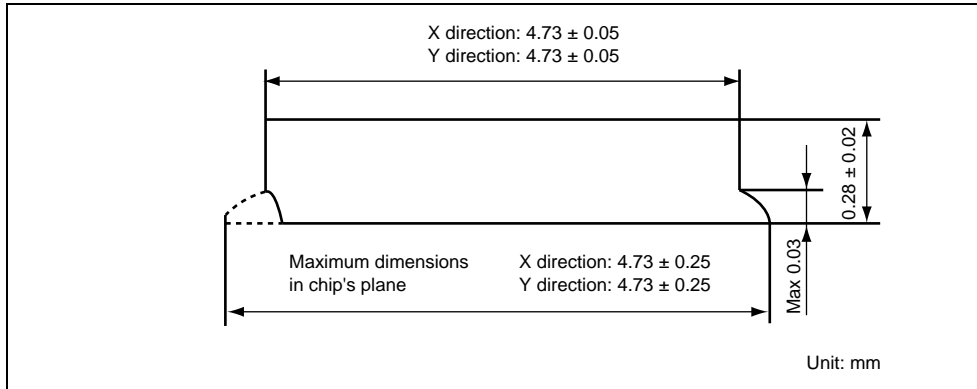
Cross-Sectional View of Chip (HCD64F38076R)
